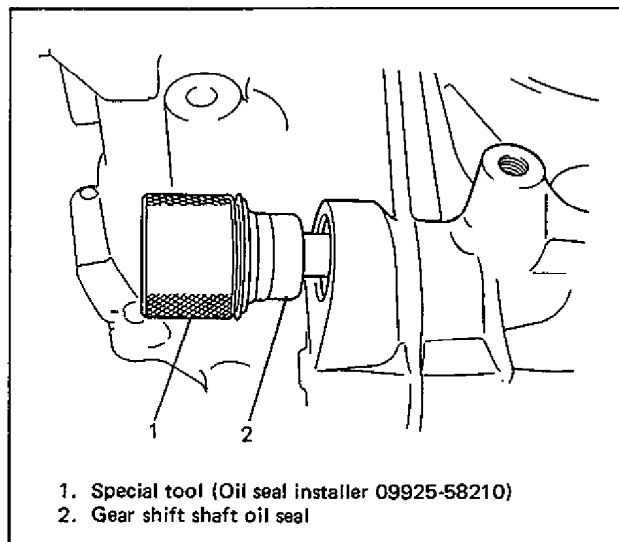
A-40 Installing Gear Shift Shaft Oil Seal
